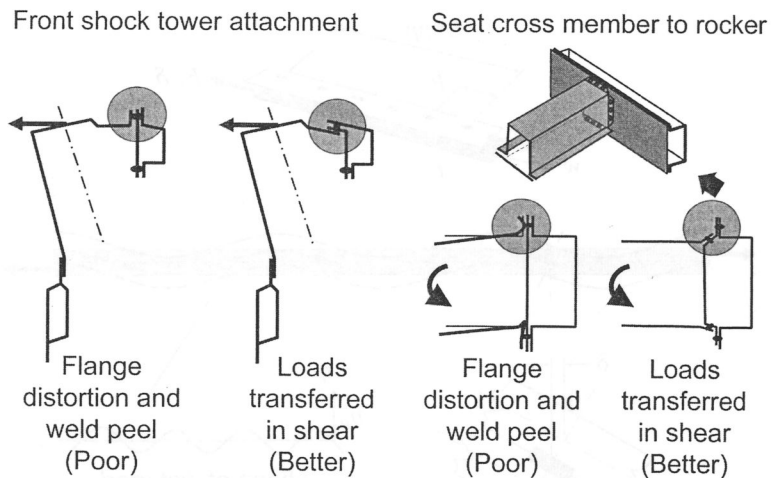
Peel loading of spot-welded joint.
